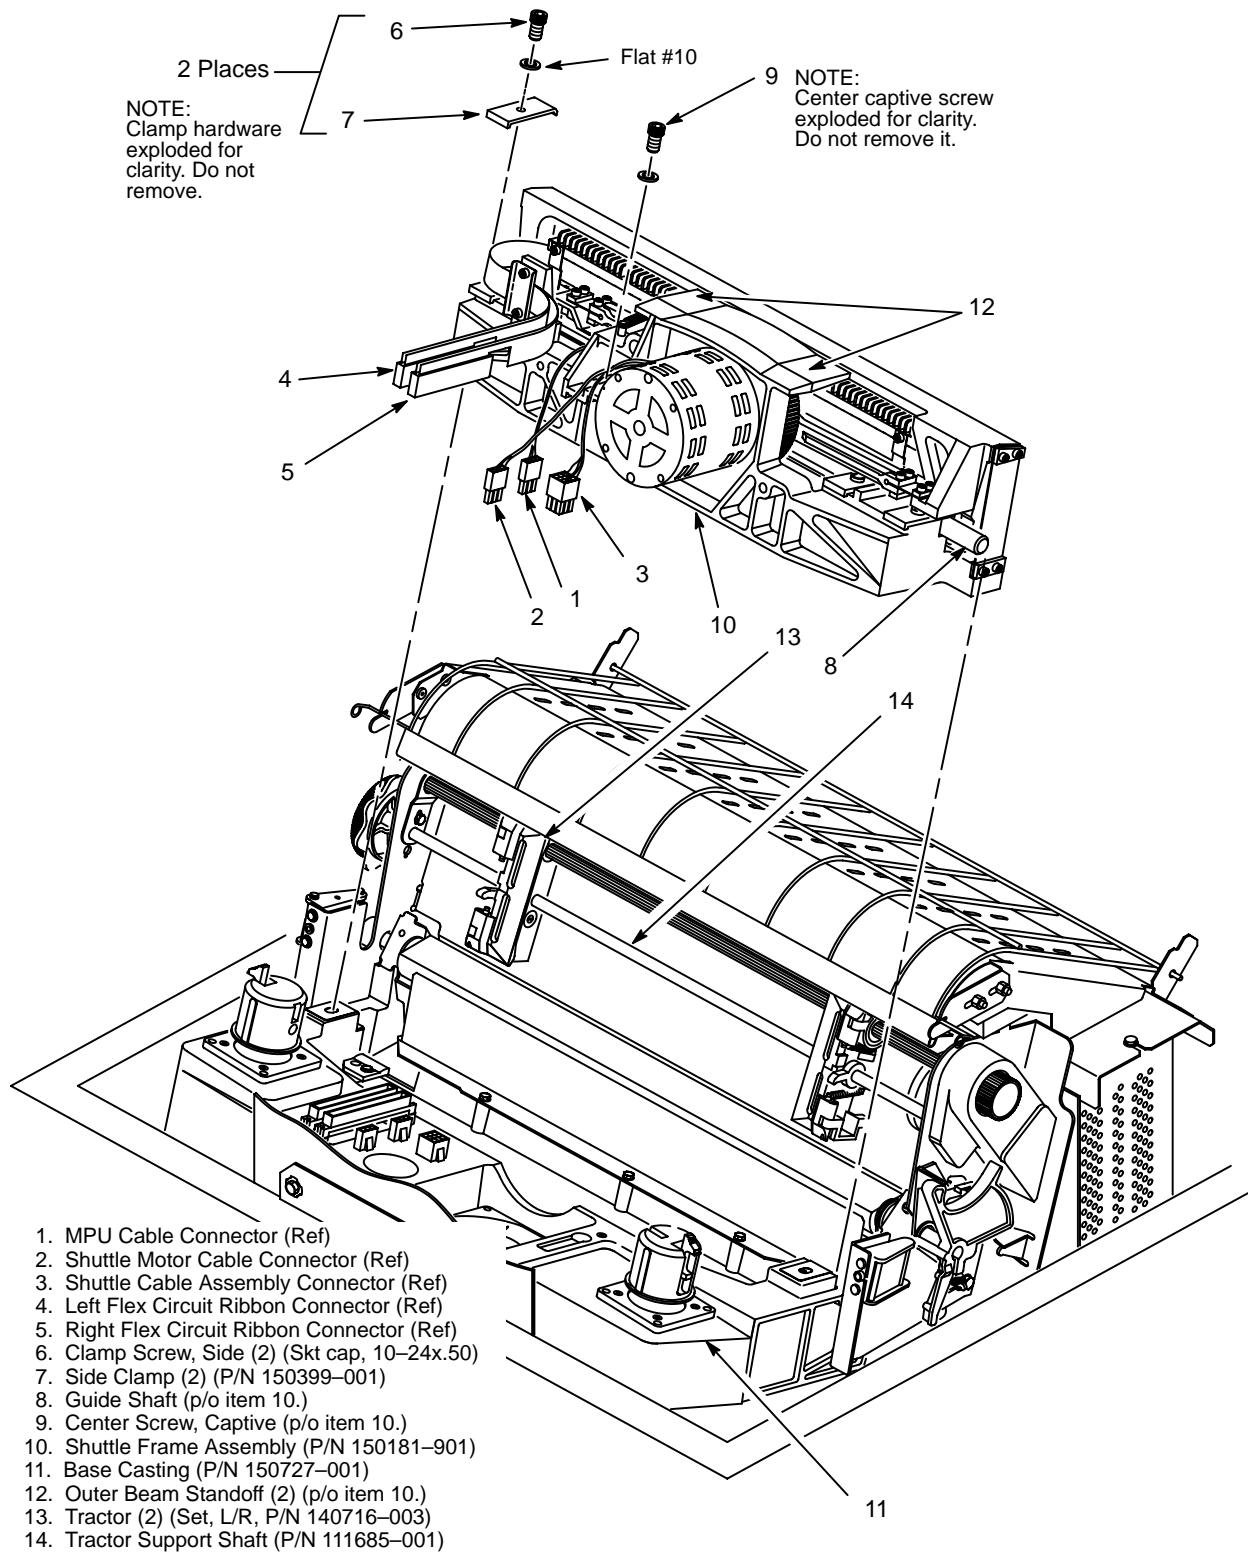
Shuttle Frame Assembly Removal/Installation
